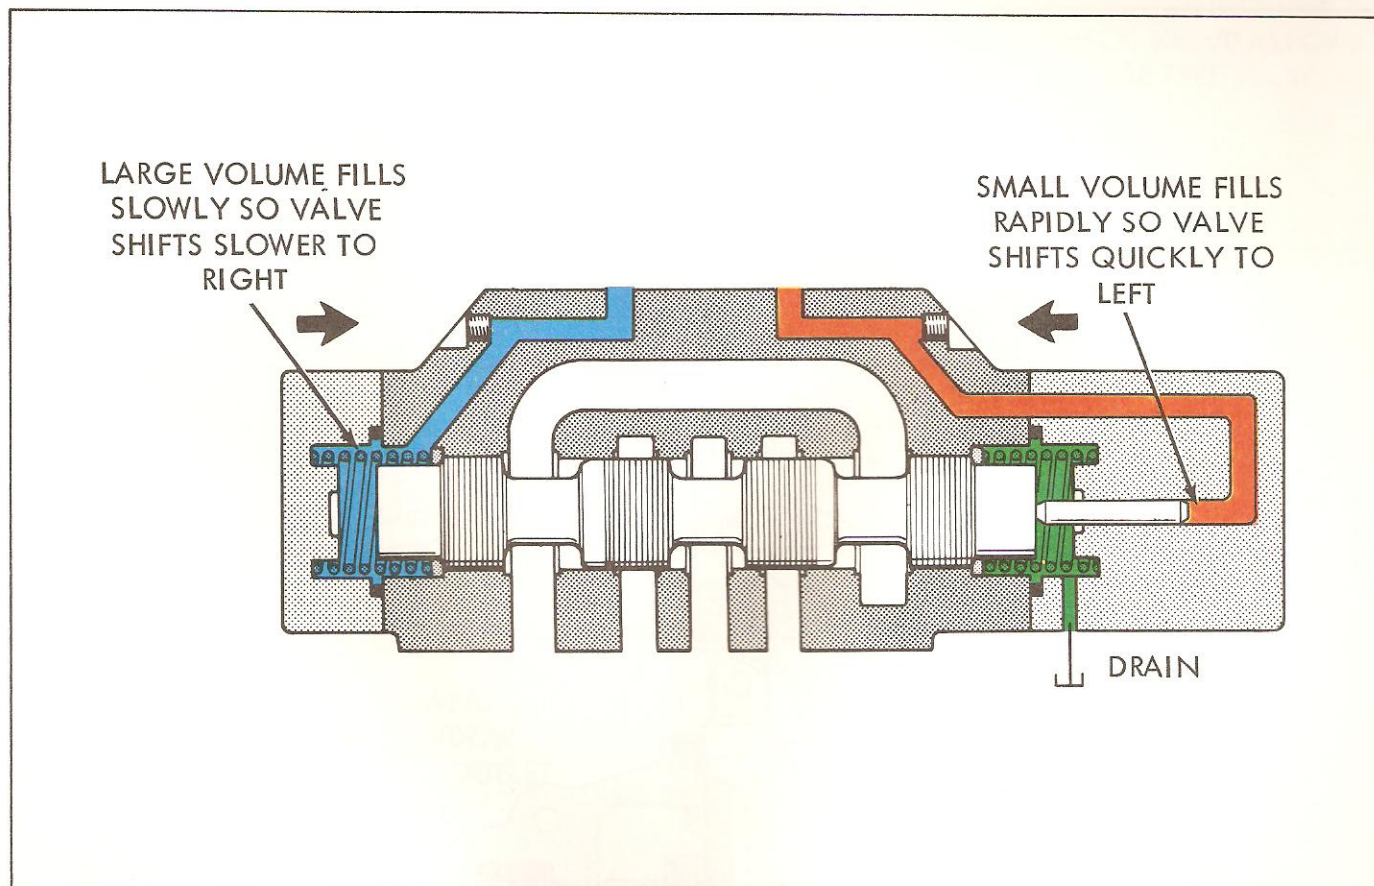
Pilot Piston Speeds Valve Shifting
